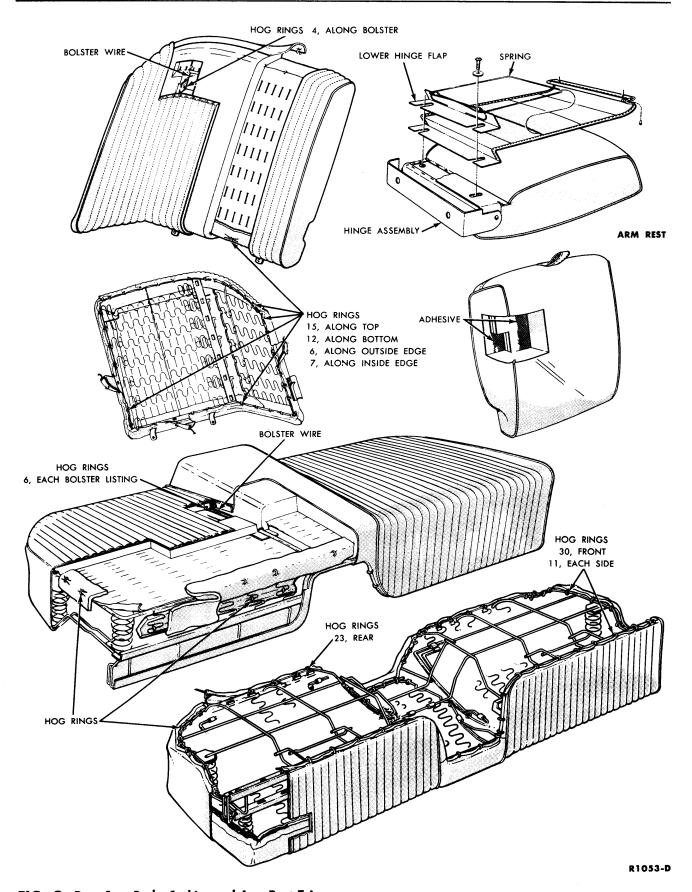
Rear Seat Back, Cushion and Arm Rest Trim
